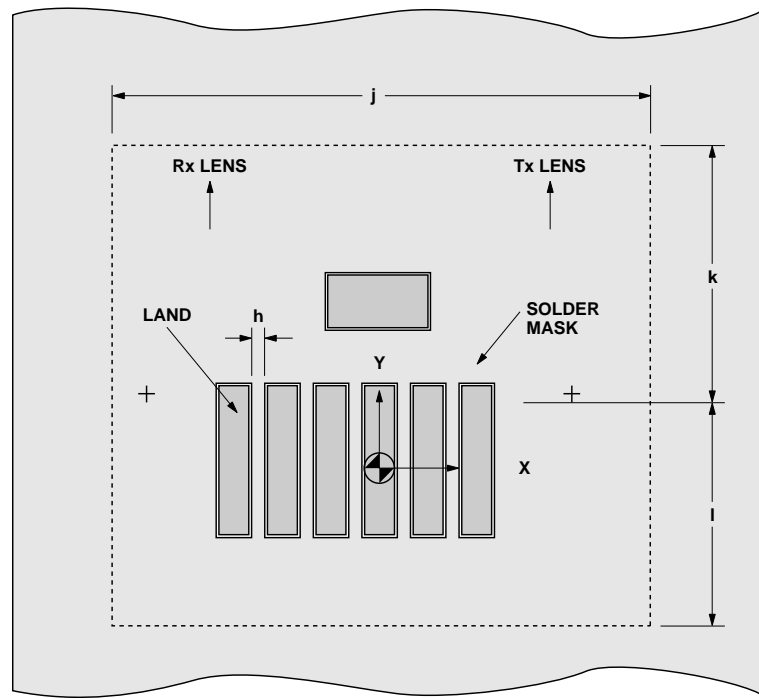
HSDL-3000#007/#017 PCBA – Adjacent land keep-out and solder mask.
